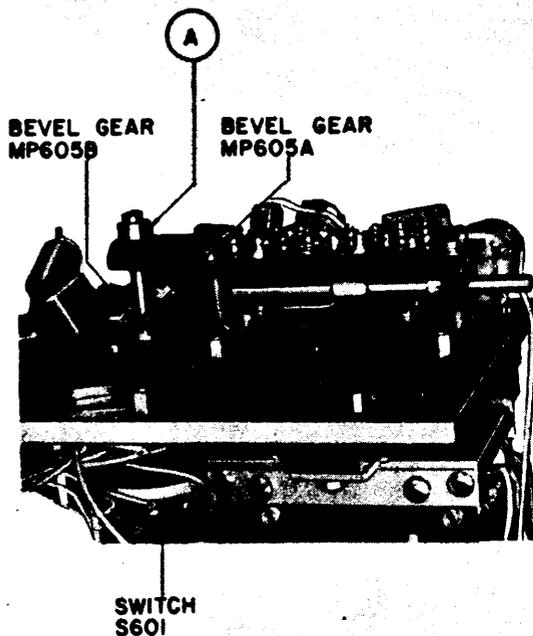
Electrical Frequency Control C-2764/WRT-2 Interpolation Oscillator, Replacement of Switch S601
